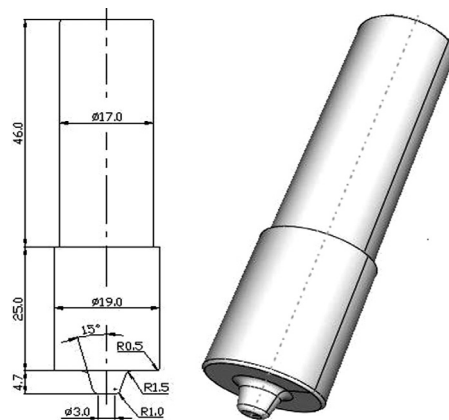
Tool for the friction-stir welding with a backing plate on water desk
